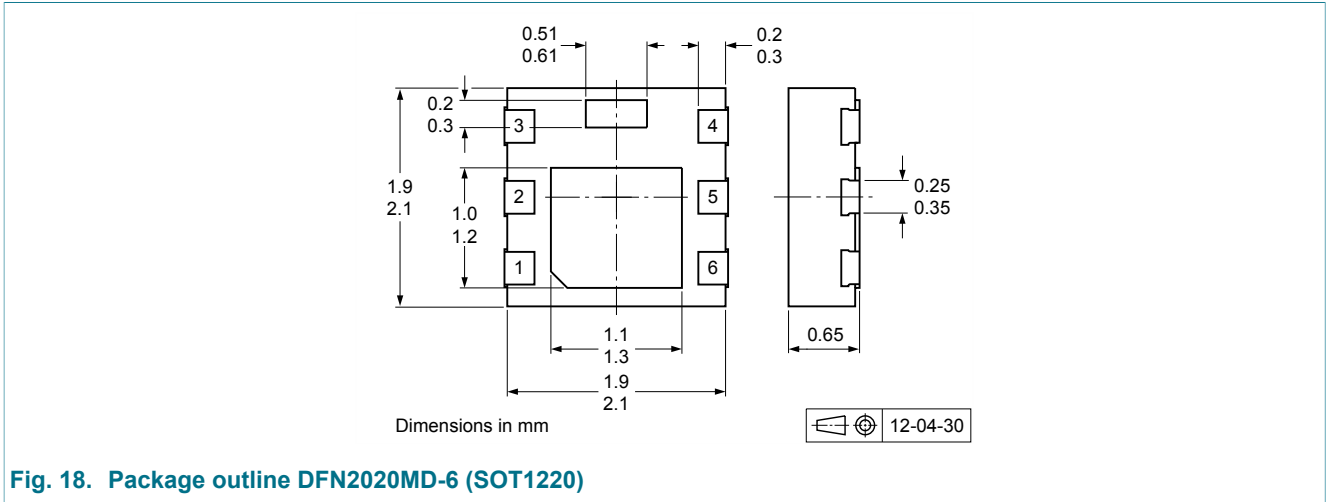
Package outline DFN2020MD-6 (SOT1220)
